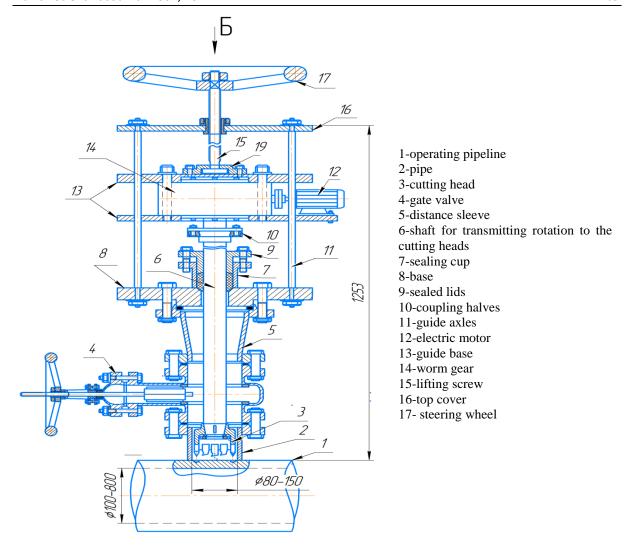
General view of the position of the drill hole cutter installed in the pressure pipe.
